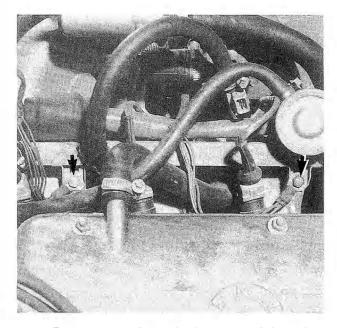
Fuel rail mounting bolts on 4-cylinder engines (arrows).
